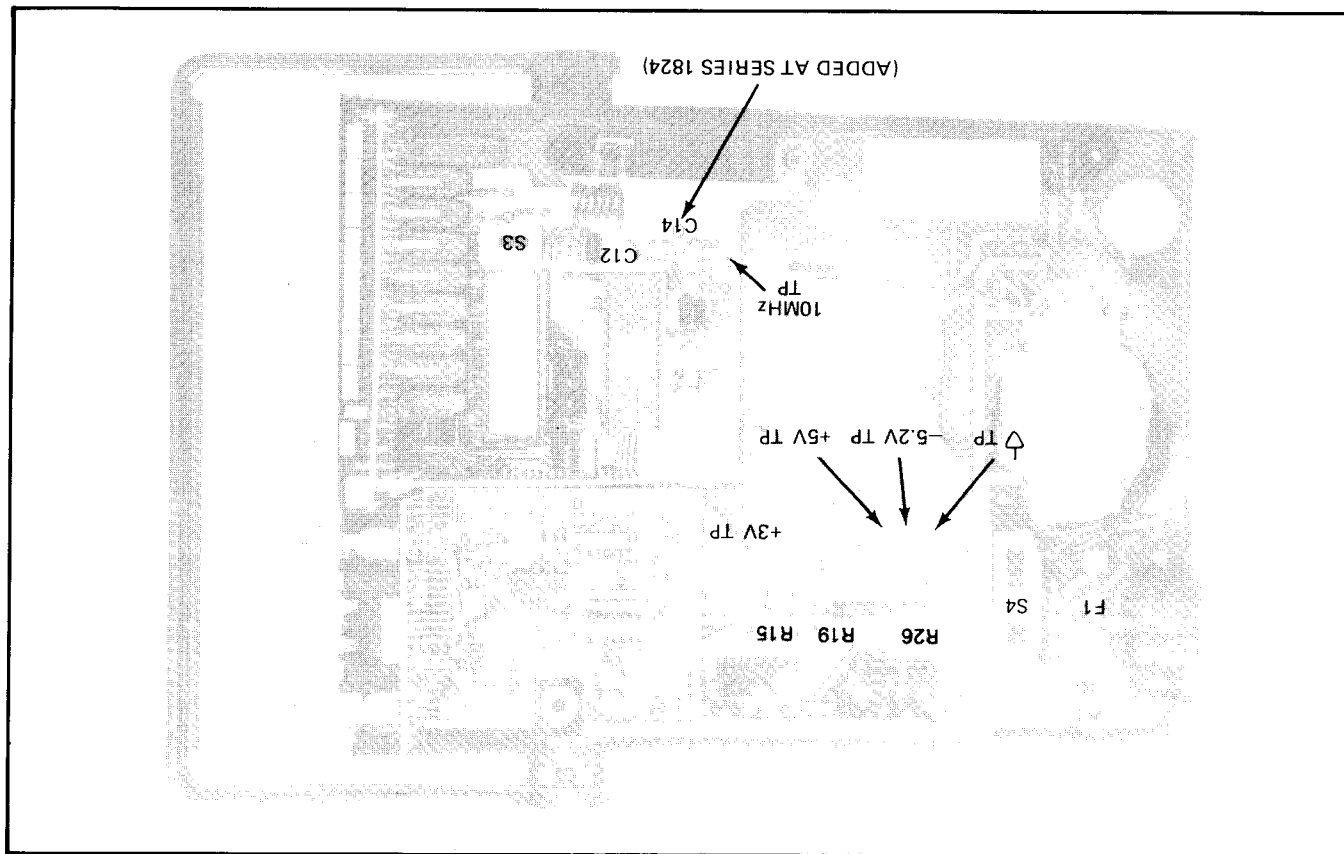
Adjustment Component Locator (A1 Assembly)
